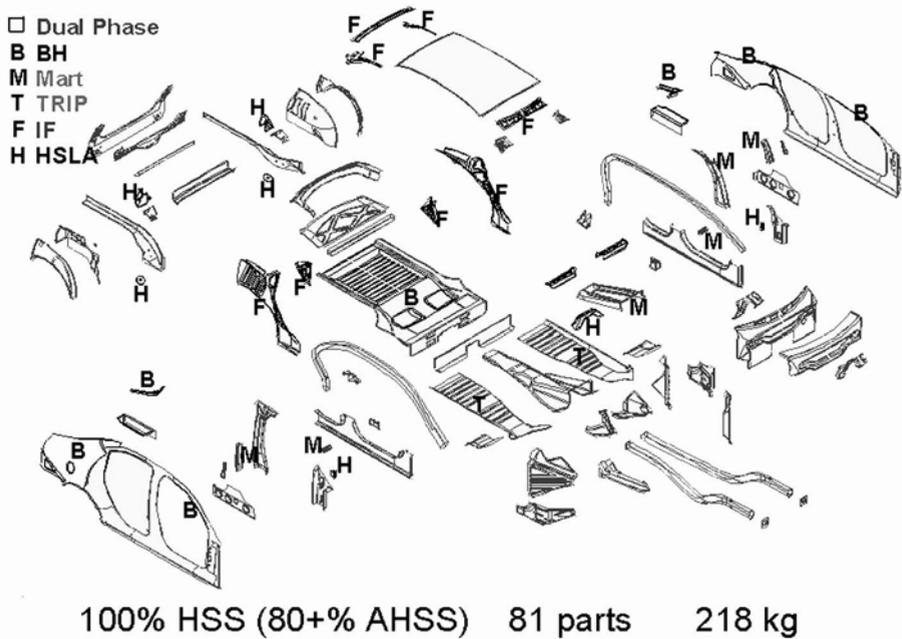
In the ULSAB prototype body parts, the steel families shown in the picture have been used.
